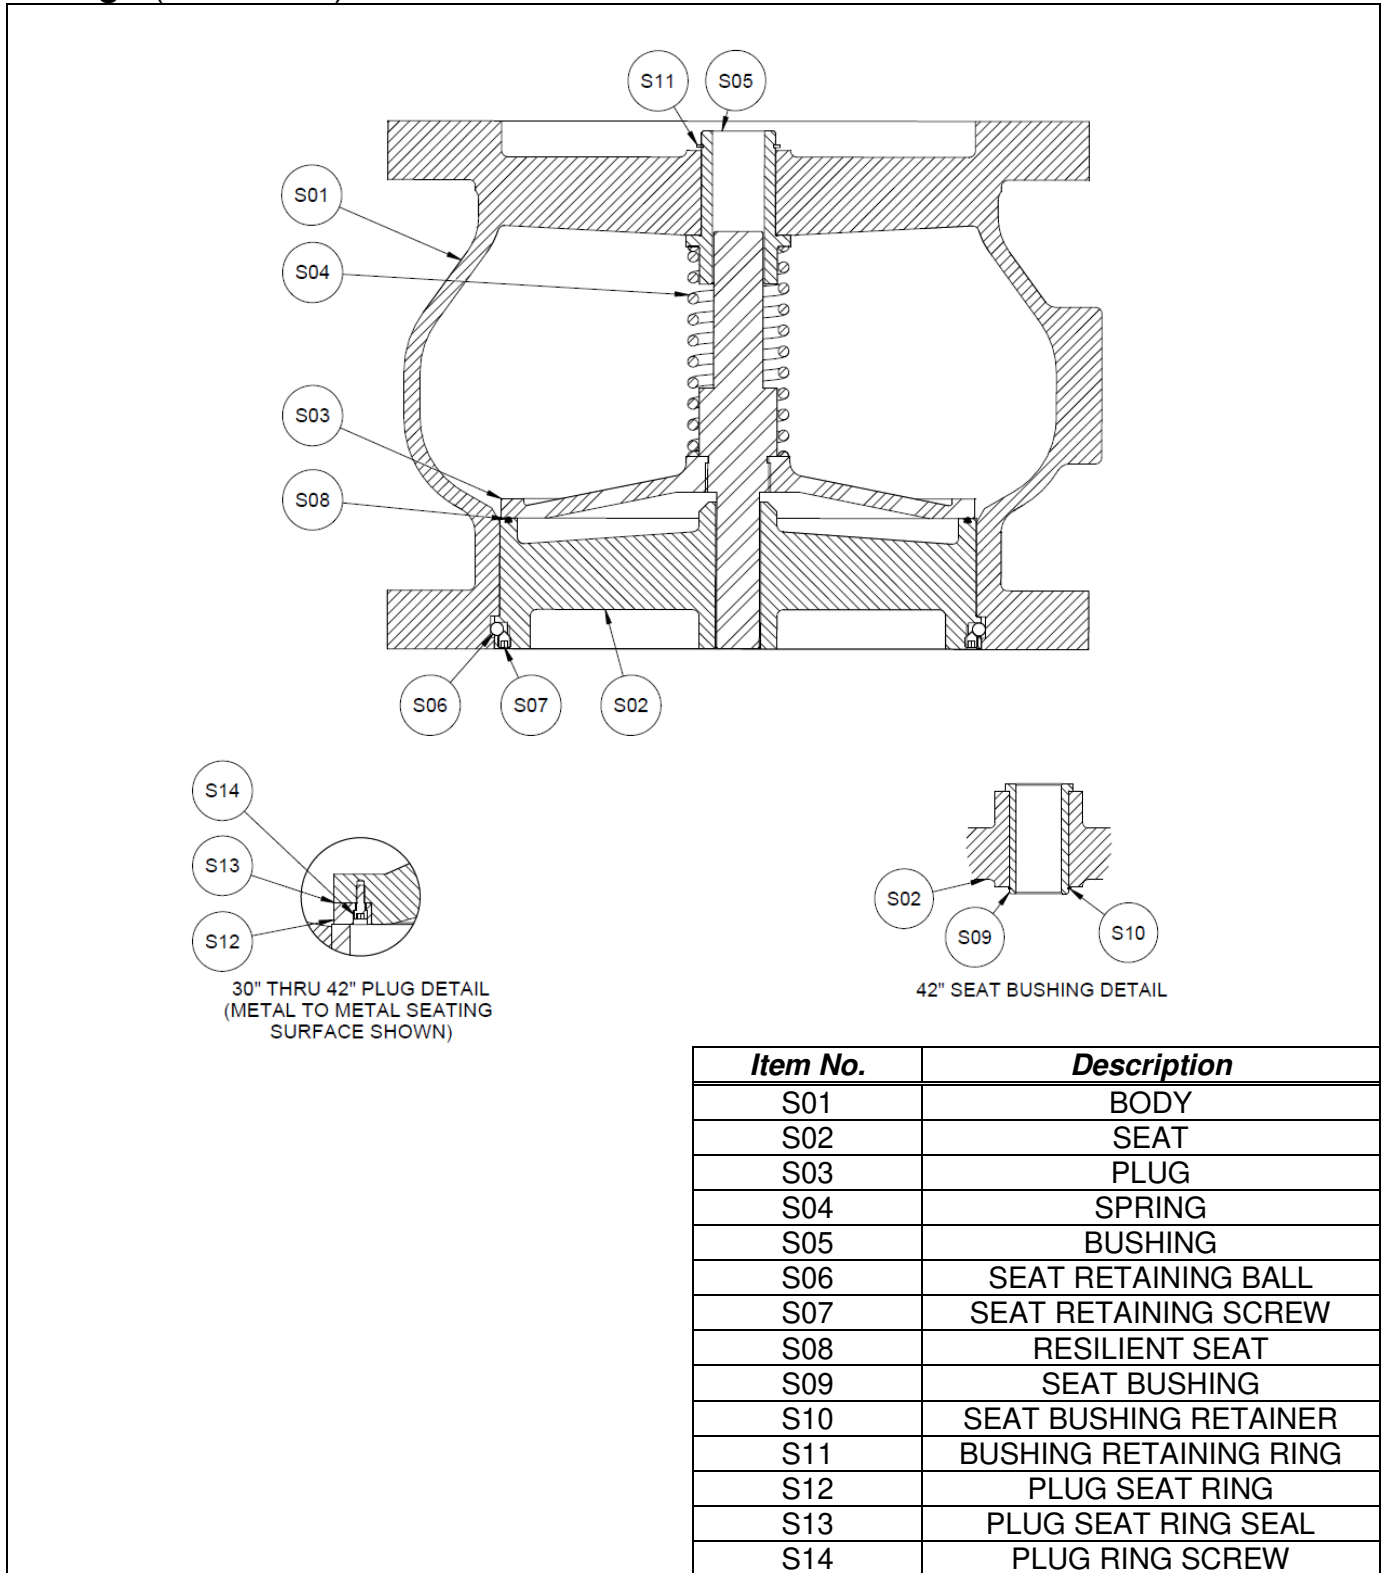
CSC-600A Globe Style Silent Check Valve (2D Cross Section)
